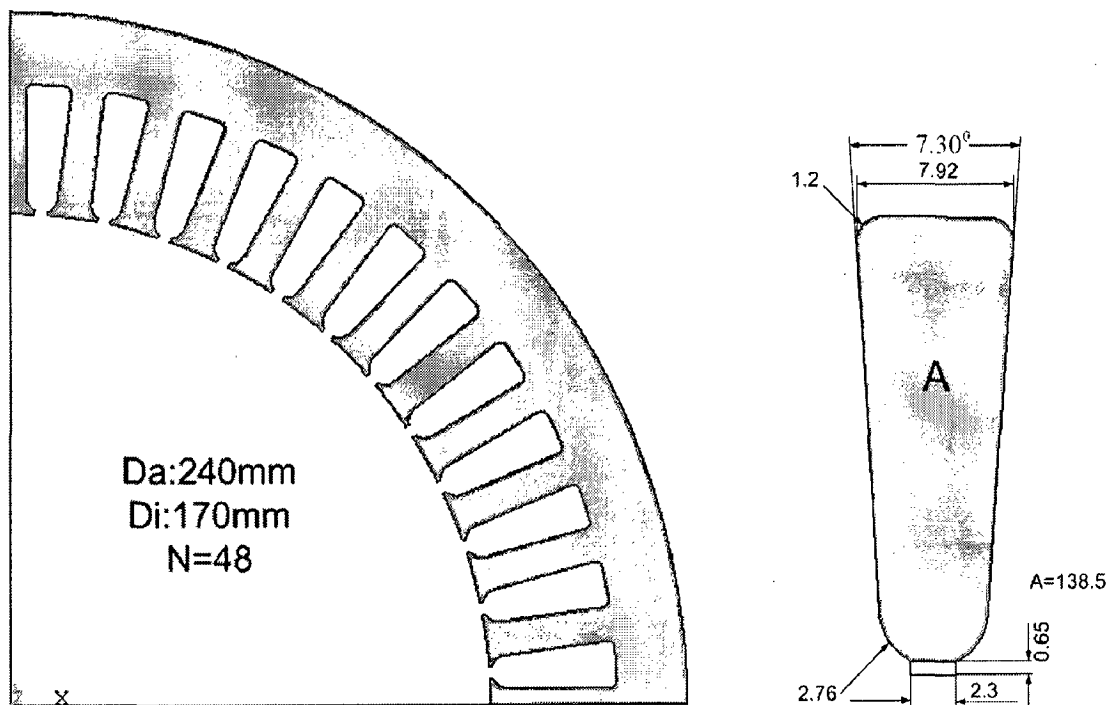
2D Stator Lamination Geometry and slot dimensions
